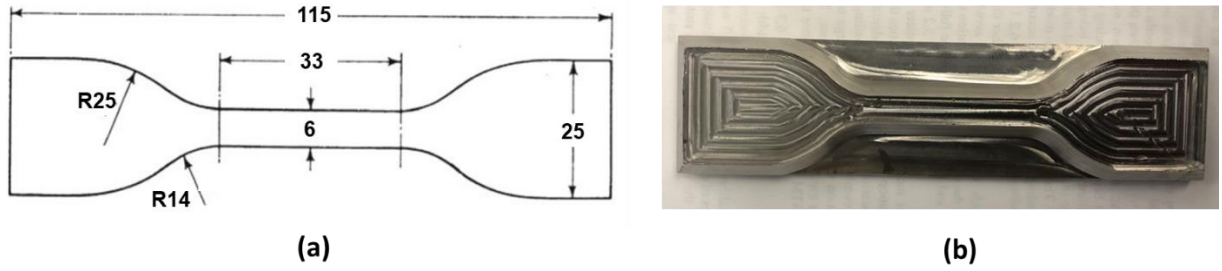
2. (a) Shape and dimensions of the dogbone sample (dimensions are in mm) and (b) the cutting die designed for the tensile test.
